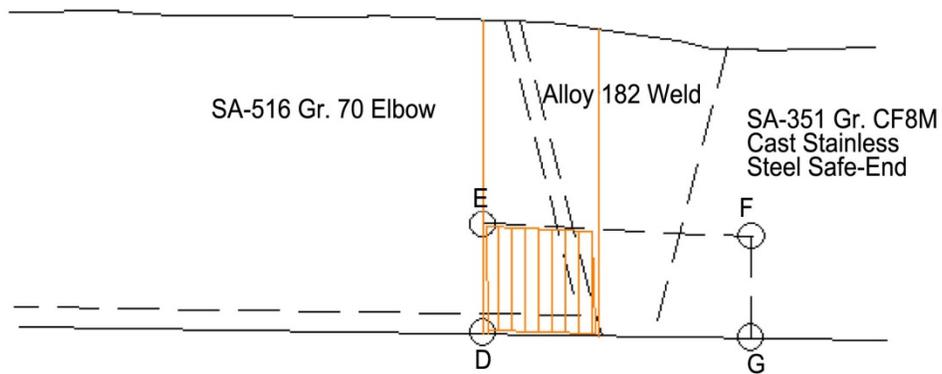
RCP Suction Nozzle Weld Circumferential Scan Coverage Assessment
